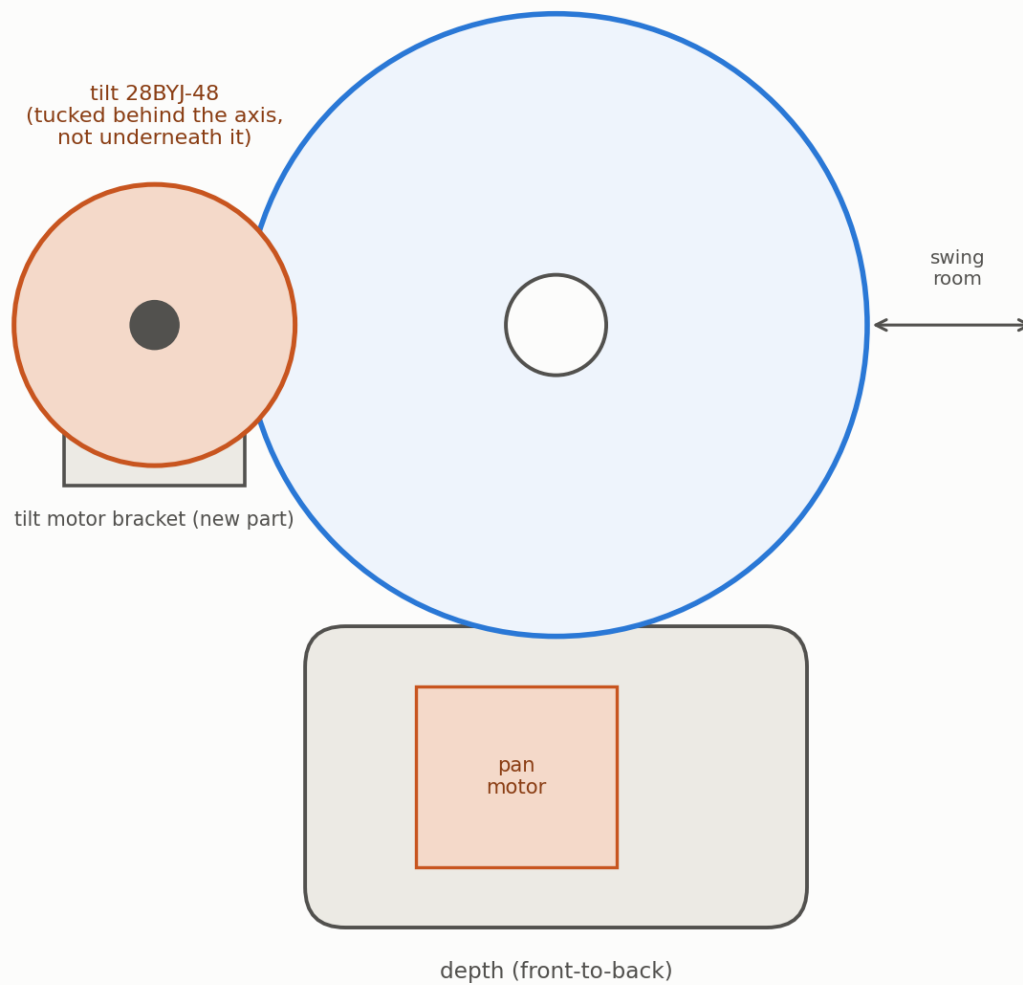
Side view, looking along the tilt axis. Depth (front-to-back) is the cheapest dimension to spend here, which is why the tilt motor tucks in behind the gear rather than sitting underneath it — putting it underneath would make the whole head taller instead.
